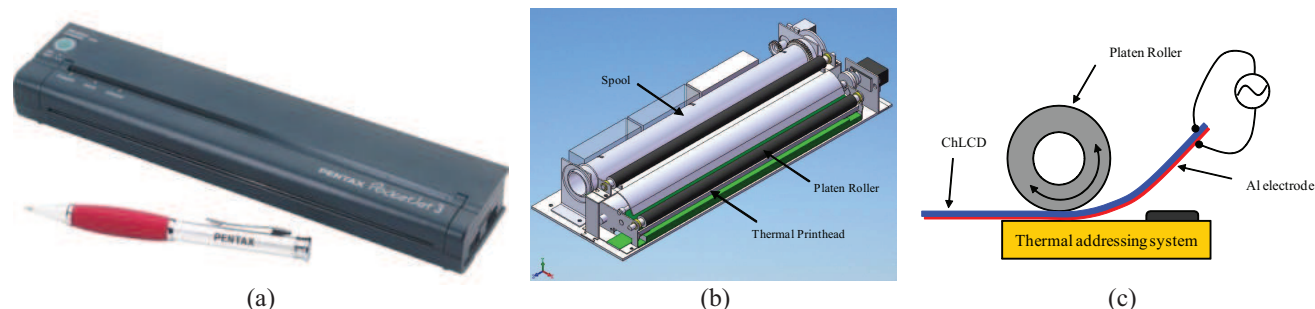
(a)The commercial portable-thermal printer Pentax PocketJet 3, (b) the mechanical structure of thermal-printer module, and (c) addressing mechanism.
